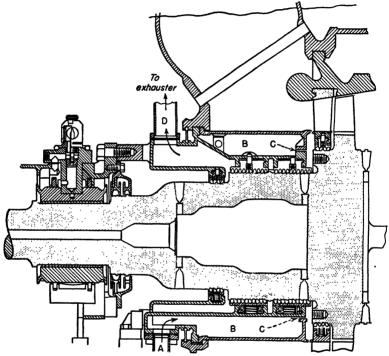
Details of gland sealing and turbine cooling arrangement of h-p of Allis-Chalmers 7,500-kw gas turbine.
